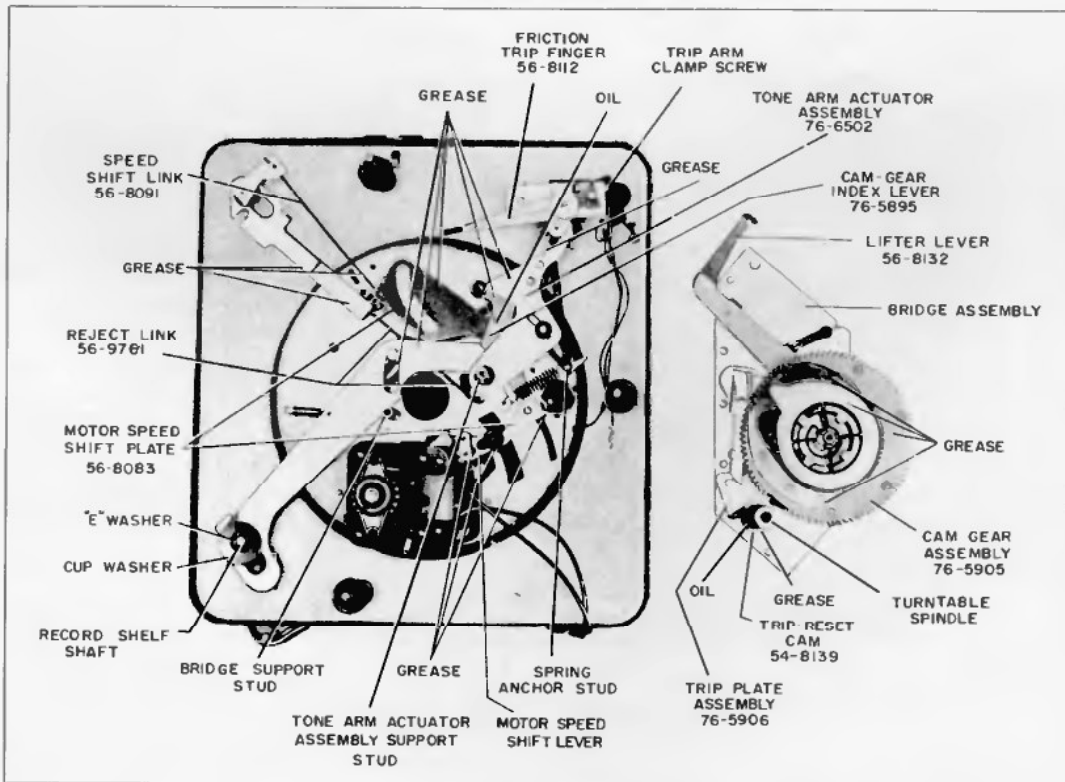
Bottom View, Bridge Removed, Showing Lubrication Points
